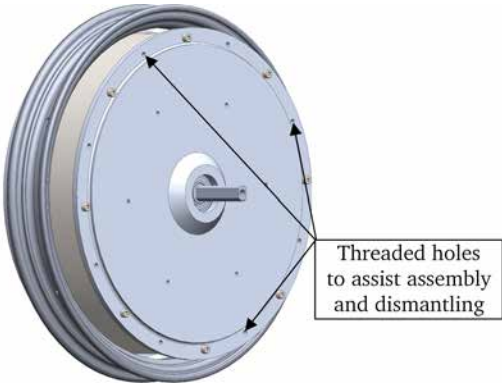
Threaded holes to ease the assembling and the dismantling of the SAT PMBLDC motor.
